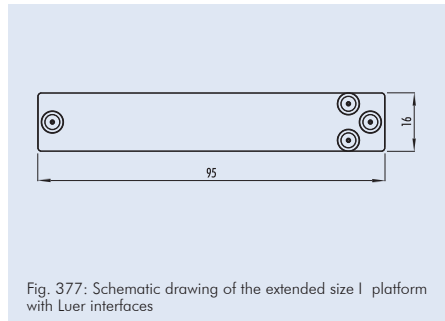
Schematic drawing of the extended size I platform with Luer interfaces
